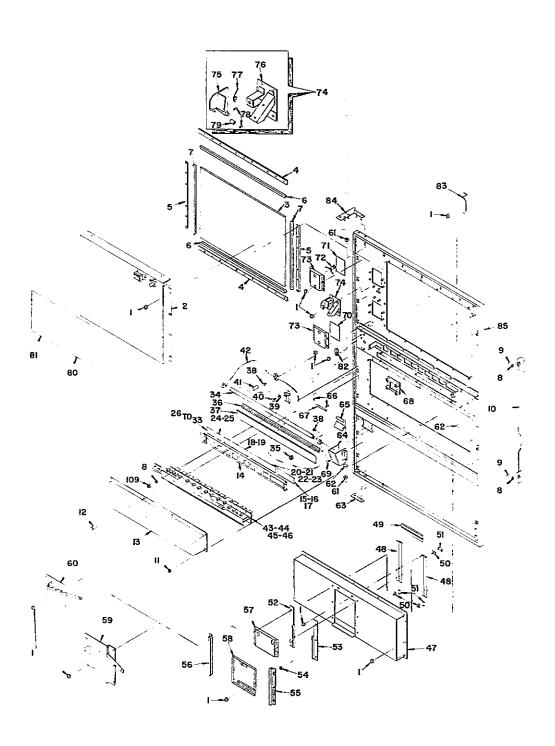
A — DOOR ASSEMBLY — ROWE AWARD
